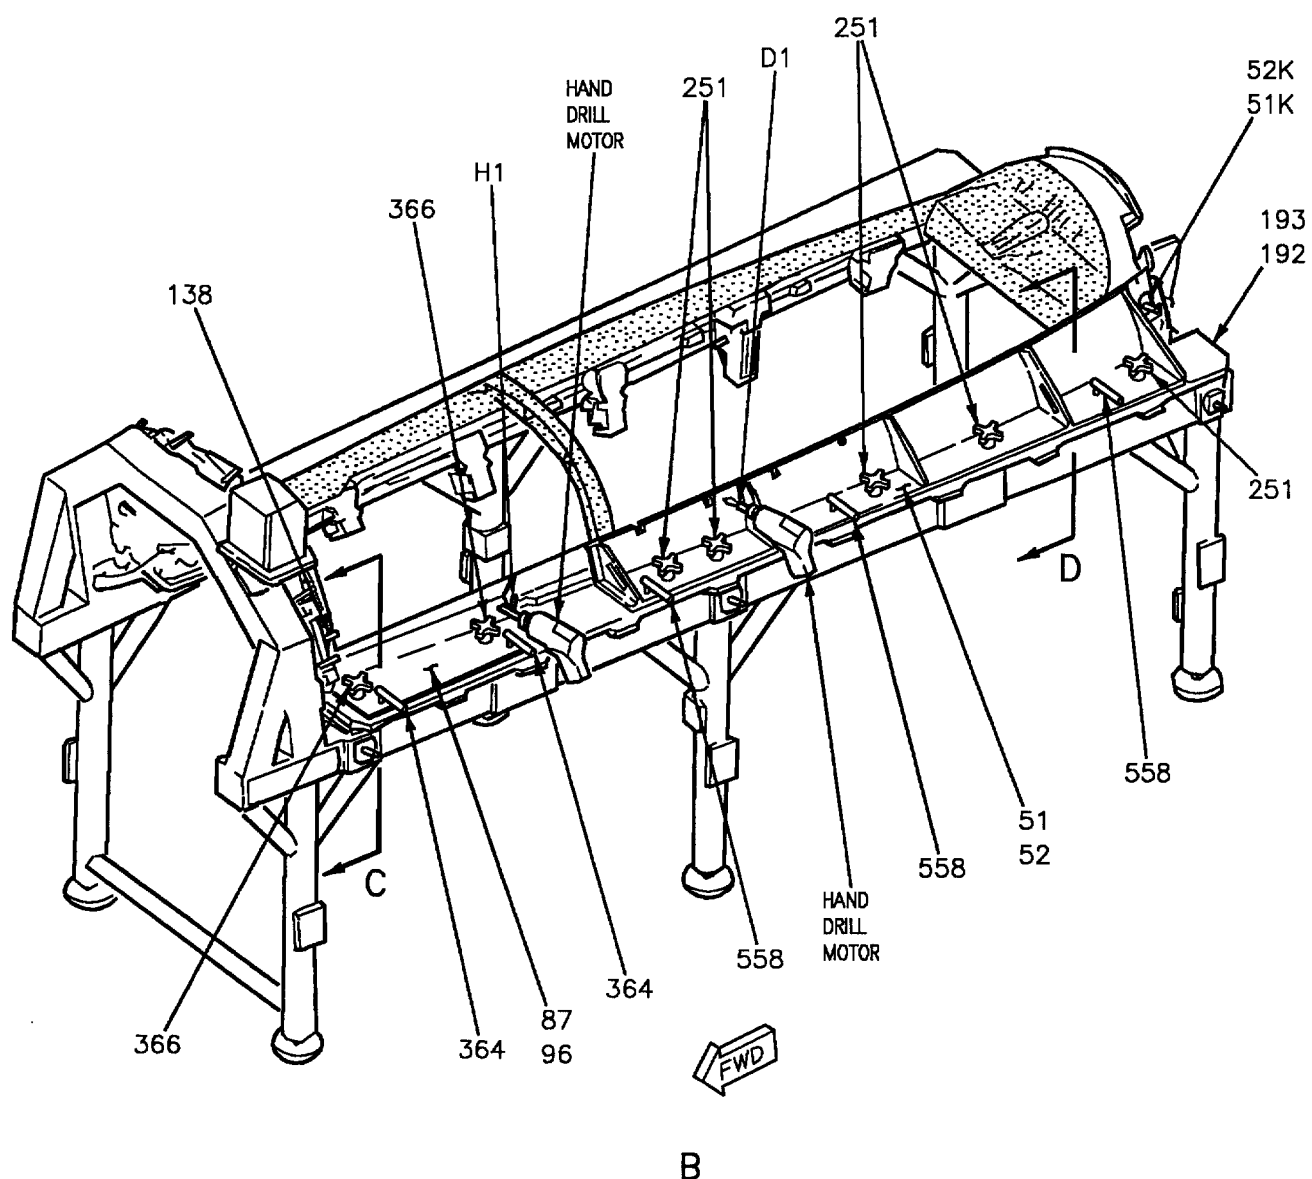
Inspection or Replacement - Side Fairing (Sheet 3)
